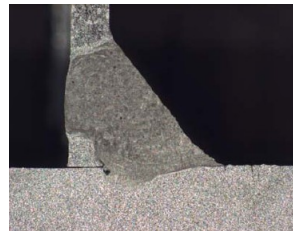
Weld test with 2mm offset corrected through feed forward correction from the clamping measurement system
